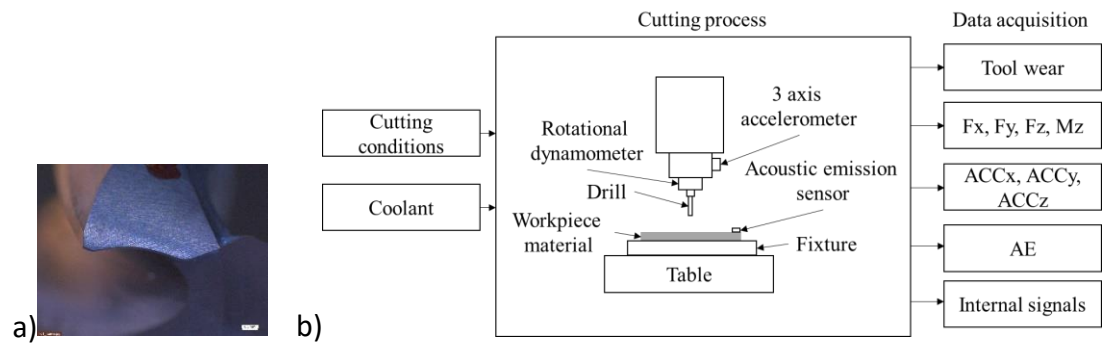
Cutting tool used in experiments and experimental setup a) Flank face b) experimental set-up
